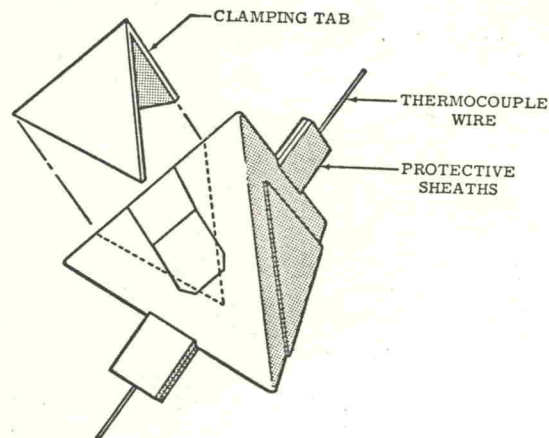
Assembled sample, showing protective sheaths for thermocouple.
